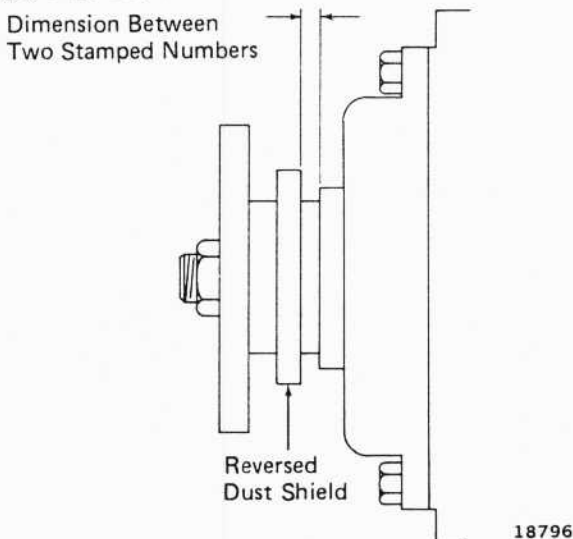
Generator Blower Drive Thrust Measurement (Double Stamped)
